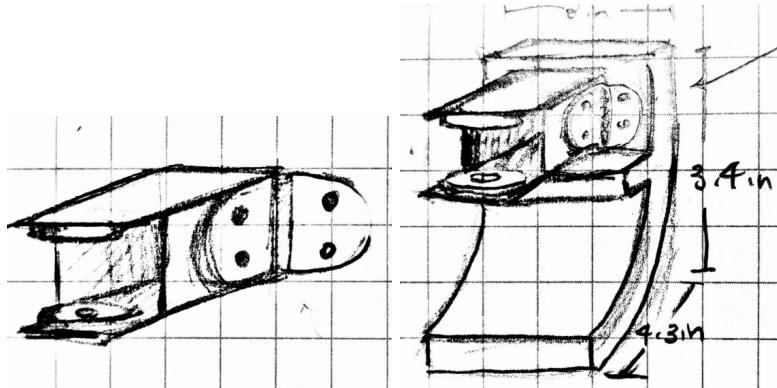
Rough CAD of what final assembly of belt tensioner should look like.
